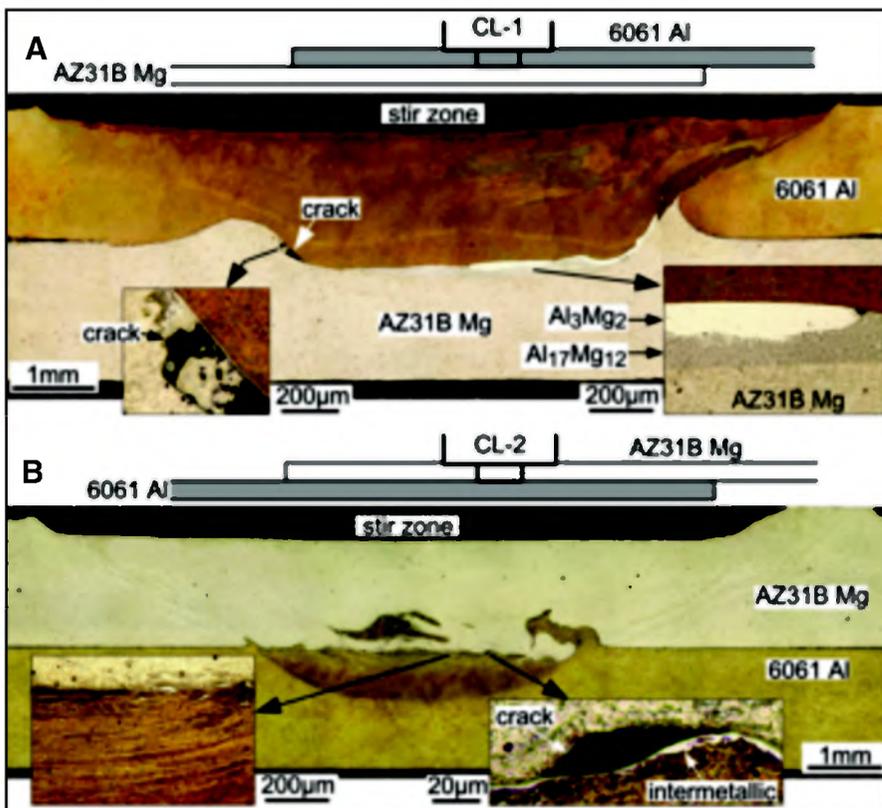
Transverse cross sections of welds in conventional lap joints. A — Weld CL-1; B — weld CL-2.
